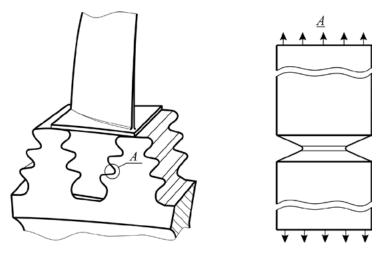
Concentators: a) – in turbine disc lock b) – equvalent specimen
